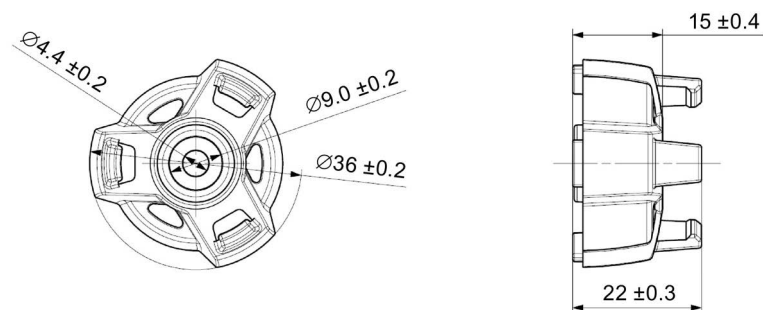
Dimension drawing of spacer 6GT2690-0AK00
